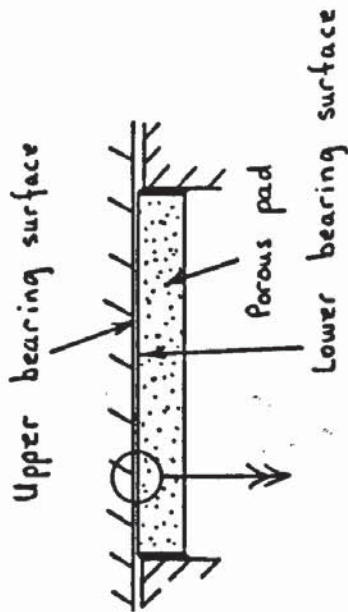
Roughness of bearing surfaces in a porous aerostatic thrust bearing: effect on minimum bearing clearance
